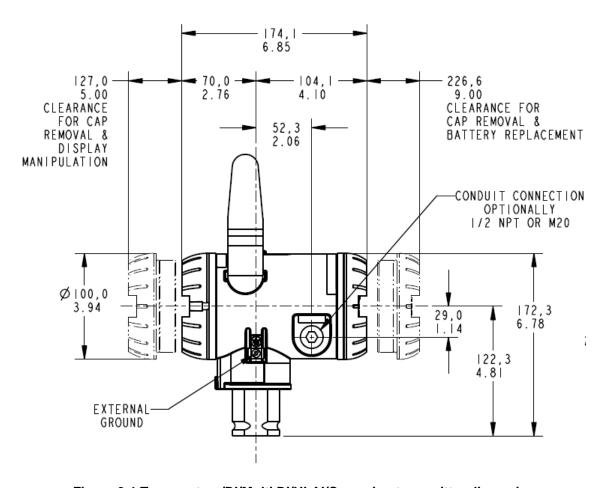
Temperature/DI/Multi DI/HLAI/Corrosion transmitter dimensions
